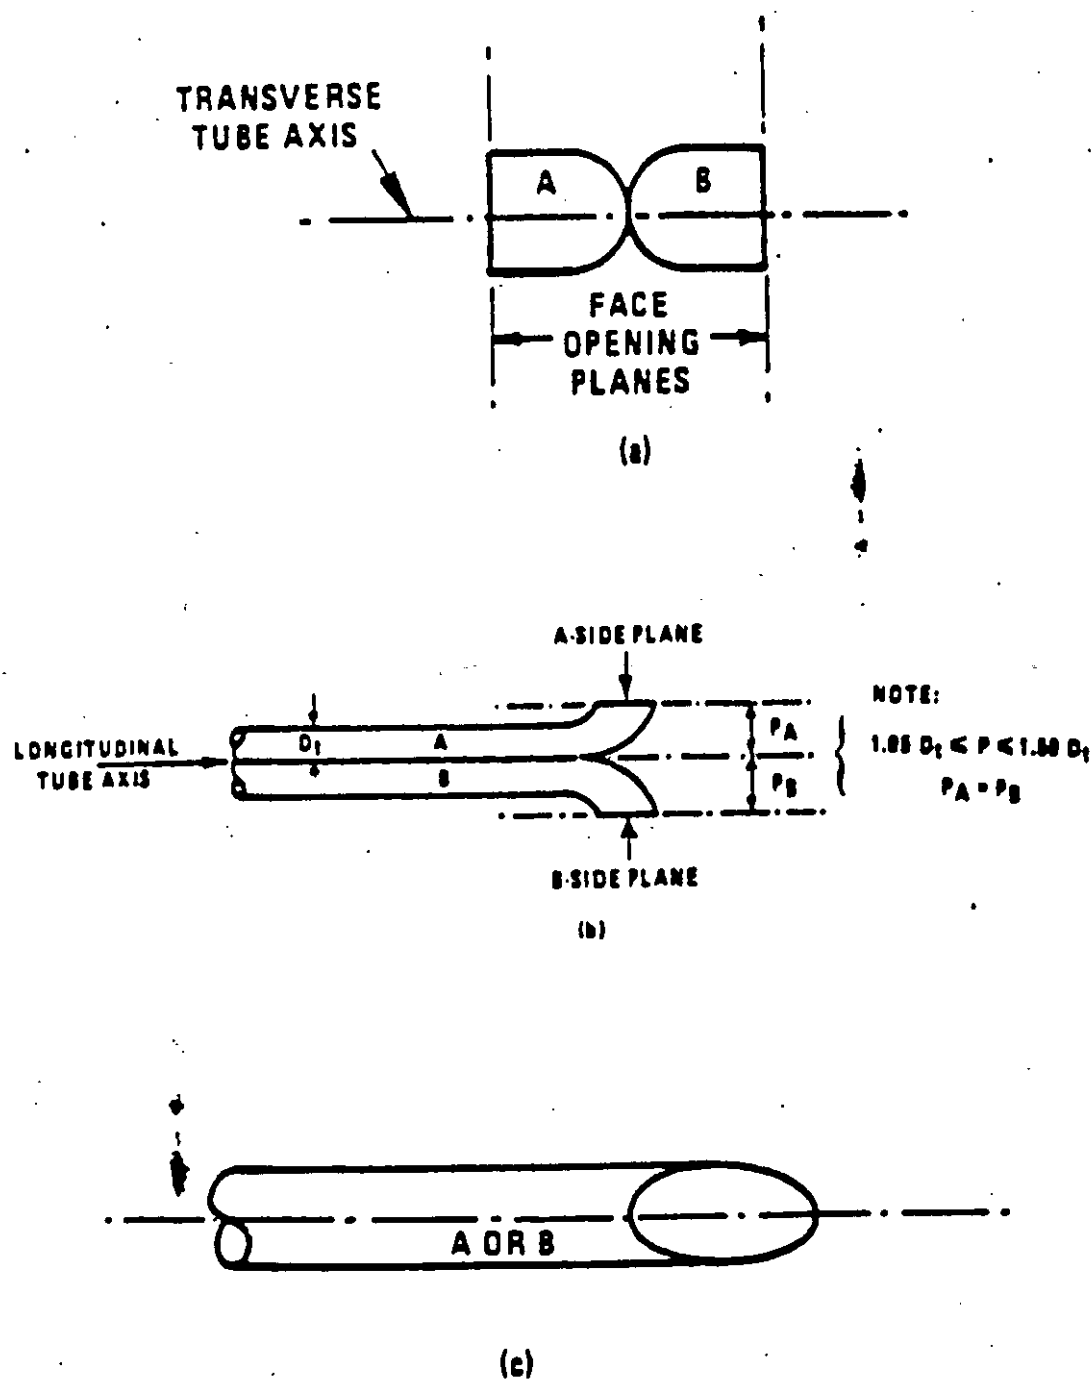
Properly constructed Type S pitot tube, shown in: (a) end view; face opening planes perpendicular to transverse axis; (b) top view; face opening planes parallel to longitudinal axis; (c) side view; both legs of equal length and centerlines coincident, when viewed from both sides. Baseline coefficient values of 0.84 may be assigned to pitot tubes constructed this way.
